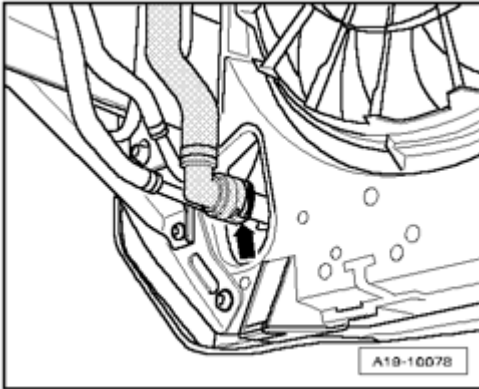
Disconnecting Coolant Hose From Lower Left Of Radiator
